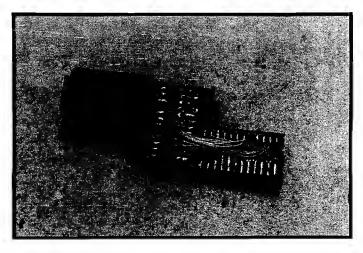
Bottom view of finished module. See text for commentary on wiring.
